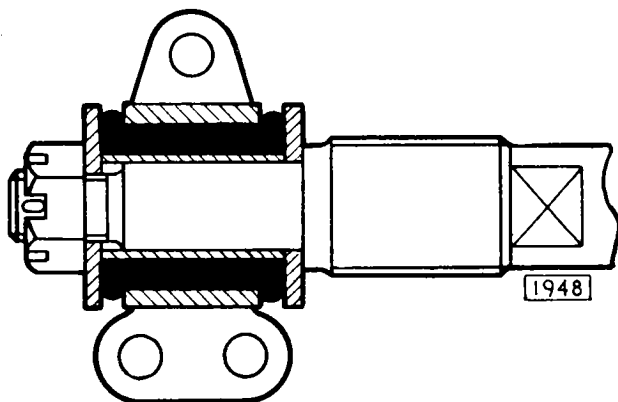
Section through one of the upper wishbone rubber/steel bushed mounting brackets.
